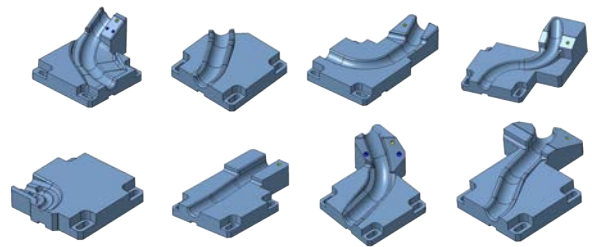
Part of the group of special tooling - assembly equipment for plastic pipes
